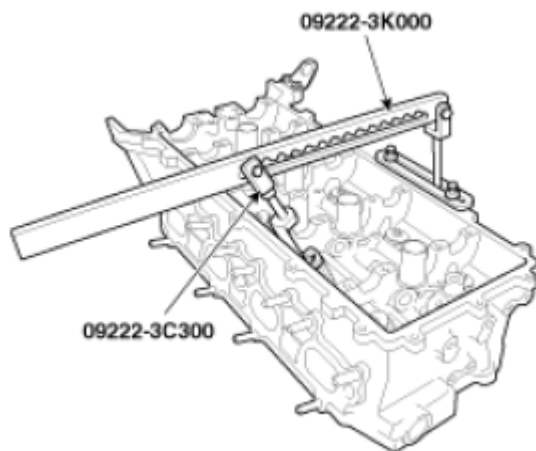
Compressing Spring Using SST(09222 - 3K000, 09222-3C300)
